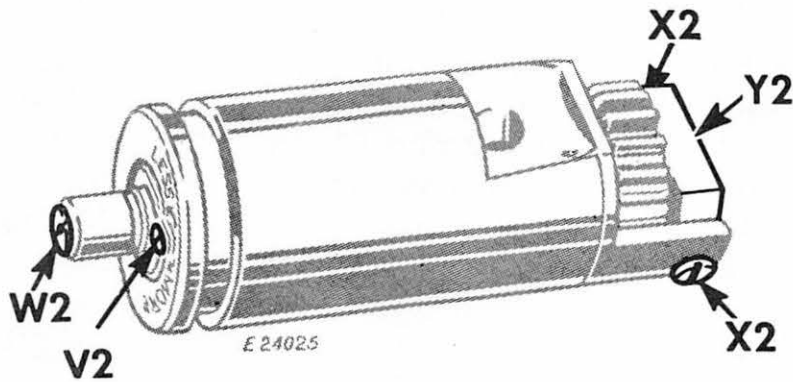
Adjustment of Oil Flow Regulator in Hook Shaft Bushing
